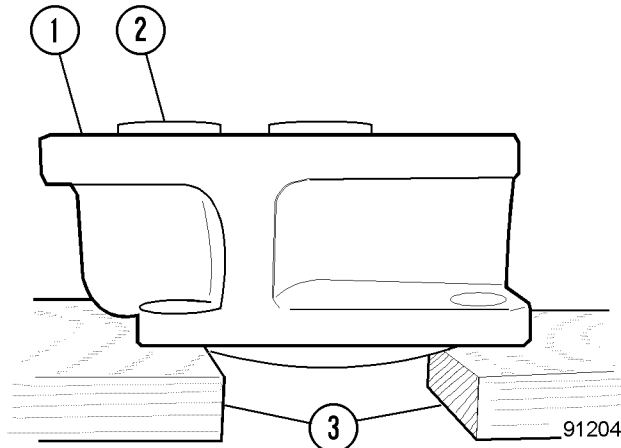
PREPARATION FOR SEAL REMOVAL
